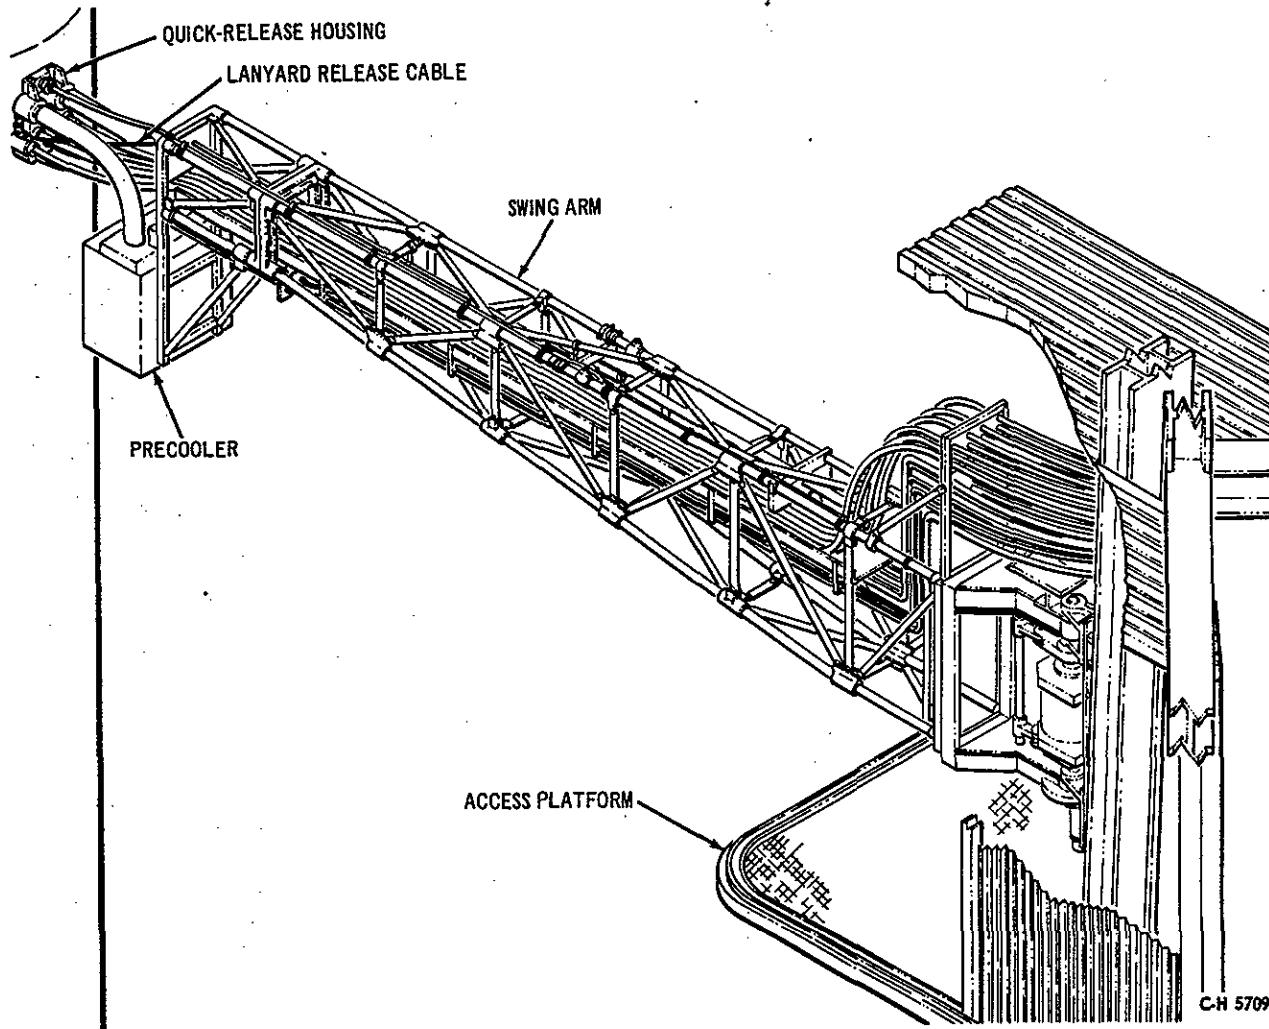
Swing Arm Assembly SA-3, -4 (Block I)
